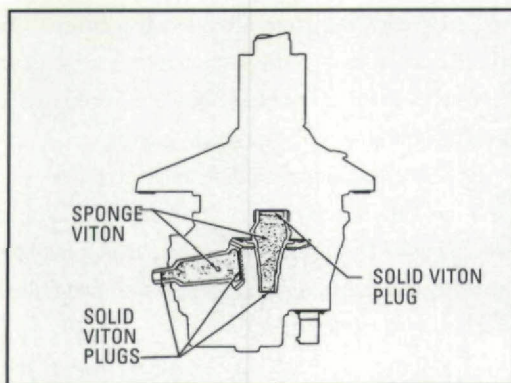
Hollow gear shafts filled with elastomer and plugged.
